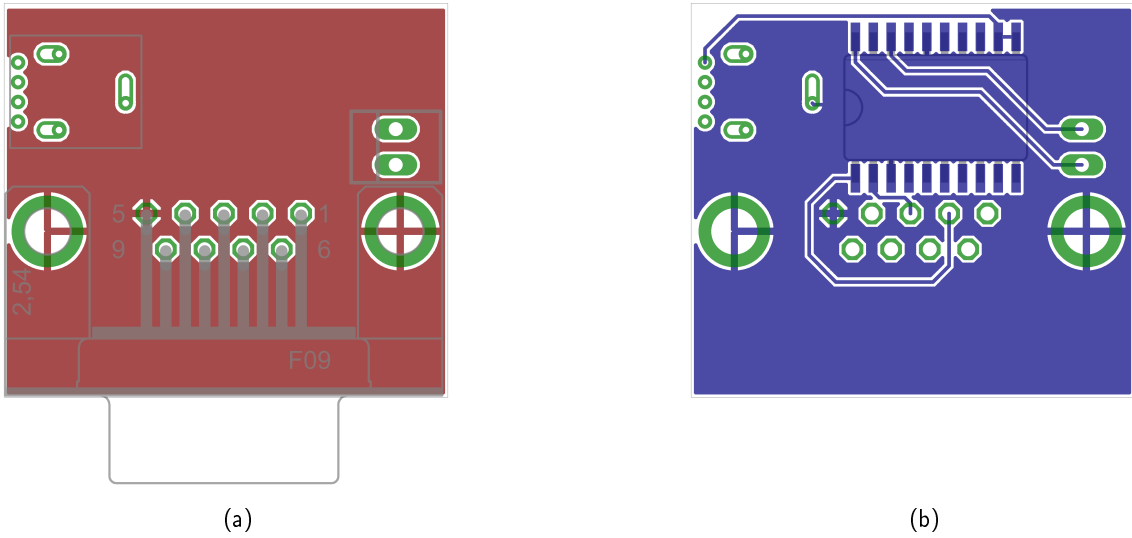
Master PCB layout: top (a) and bottom (c)
